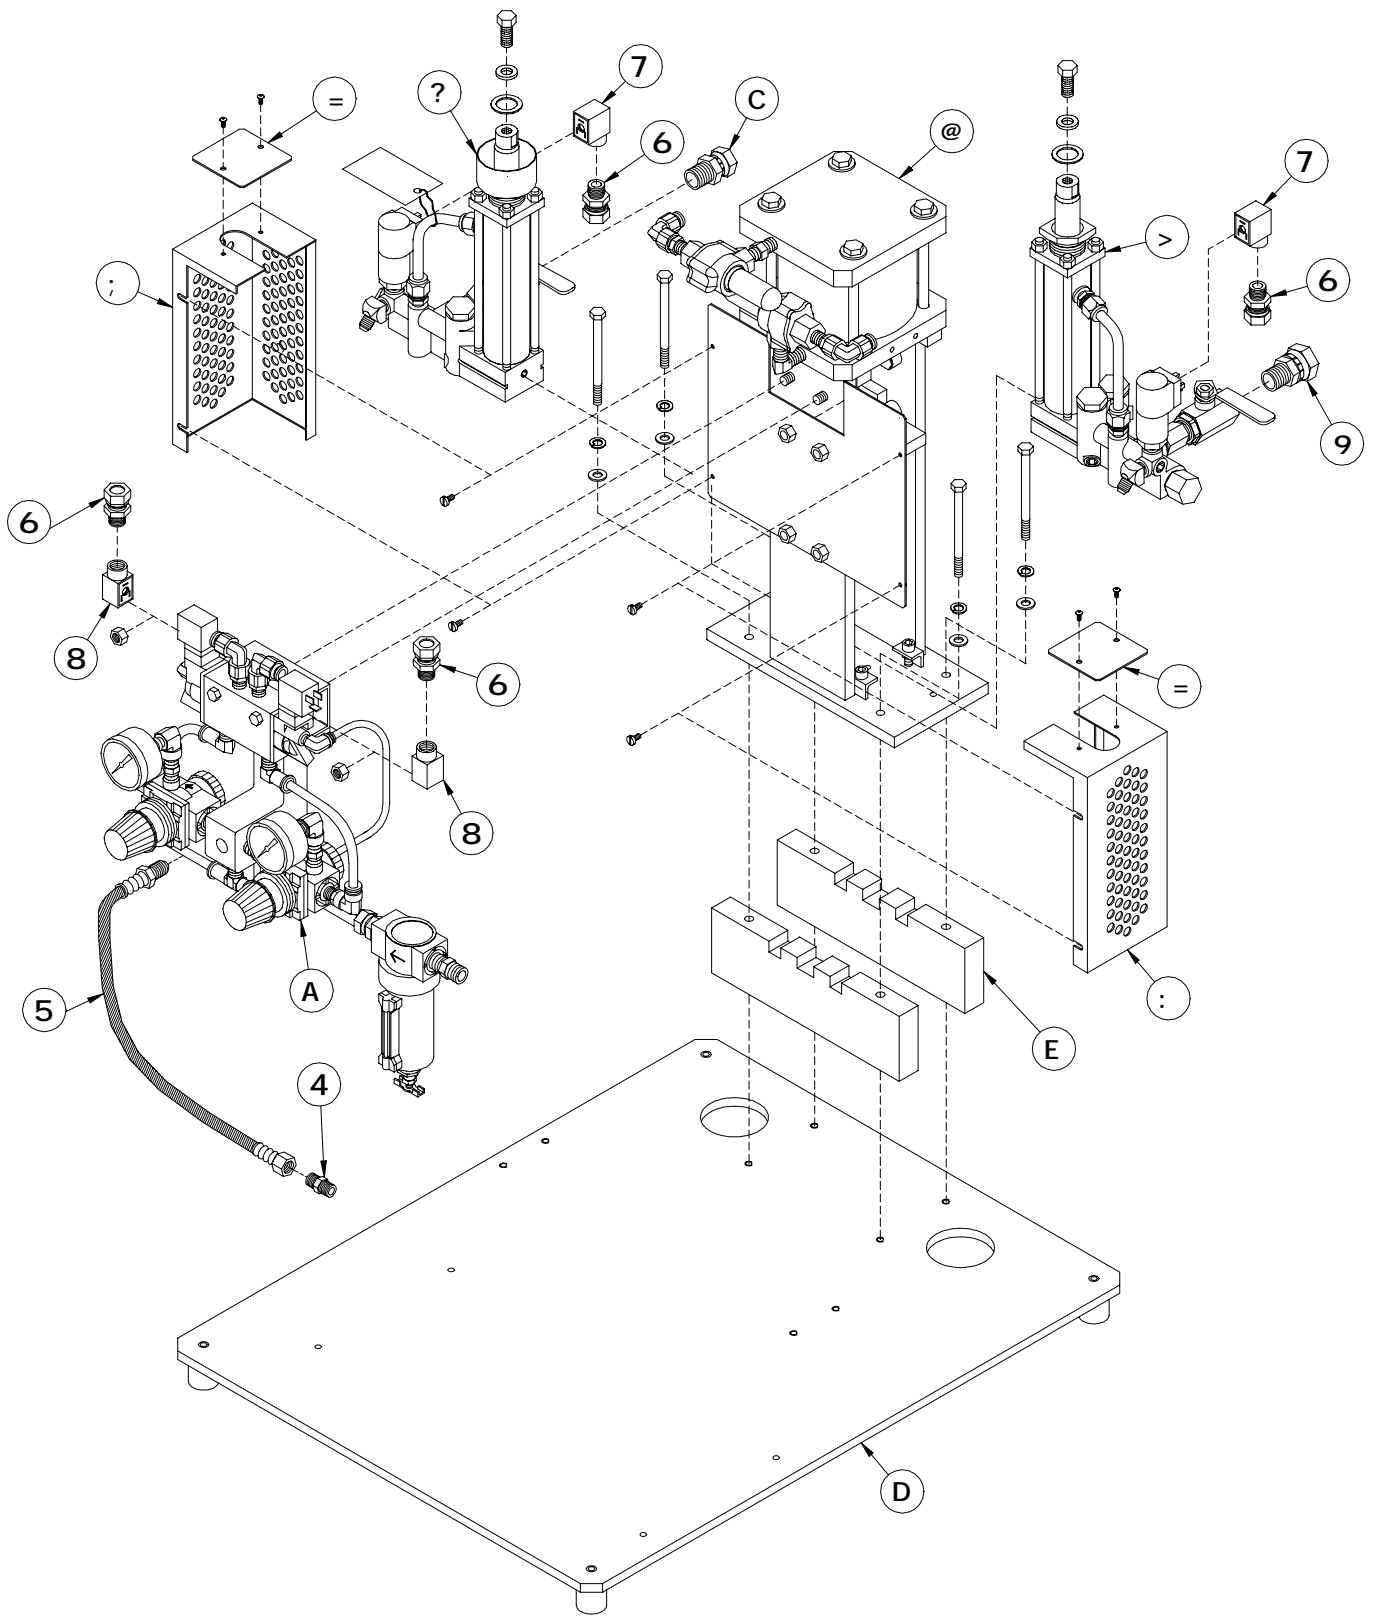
FF1600-E Final Assembly, Exploded View, Sheet 2 of 2
